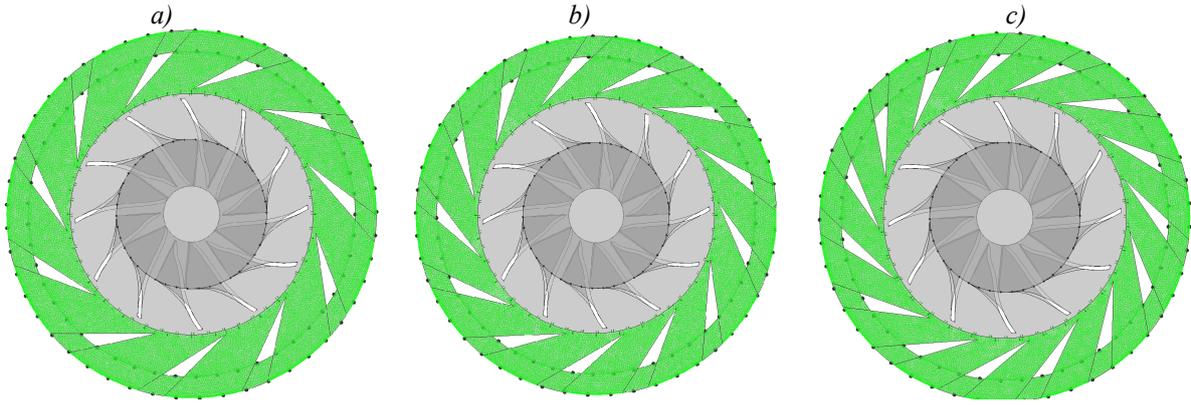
Competitive design a) 11 blades, b) 13 blades, c) 15 blades
